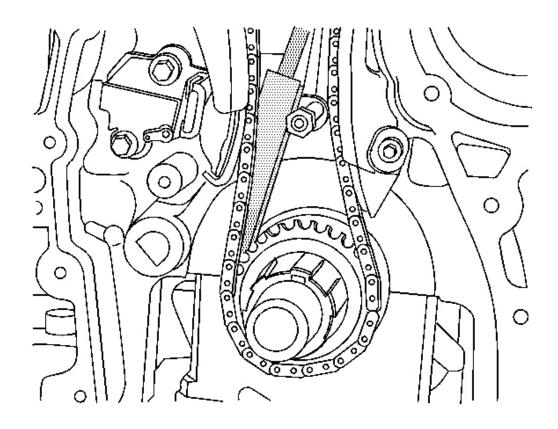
Ensuring Proper Placement Of Wedge Tool Courtesy of GENERAL MOTORS CORP.
